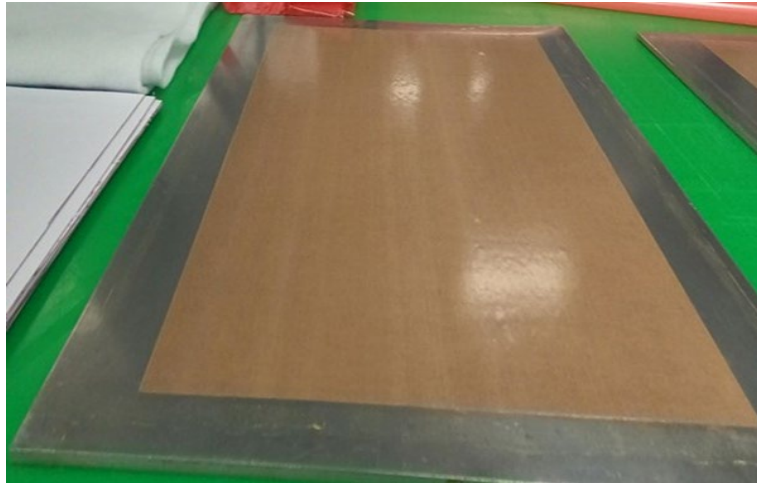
Flat mould (350mm x 400mm) coated with PTFE film sheet.
